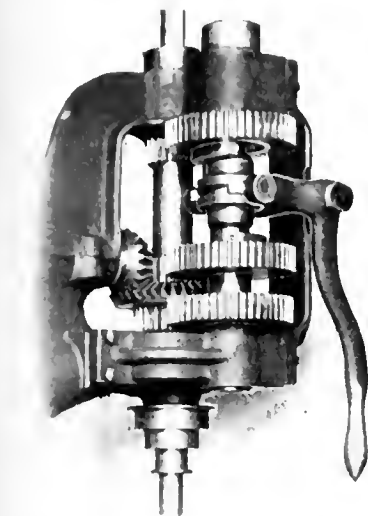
Tapping Attachment for the Drill Press, designed to prevent Cramping the Spindle
